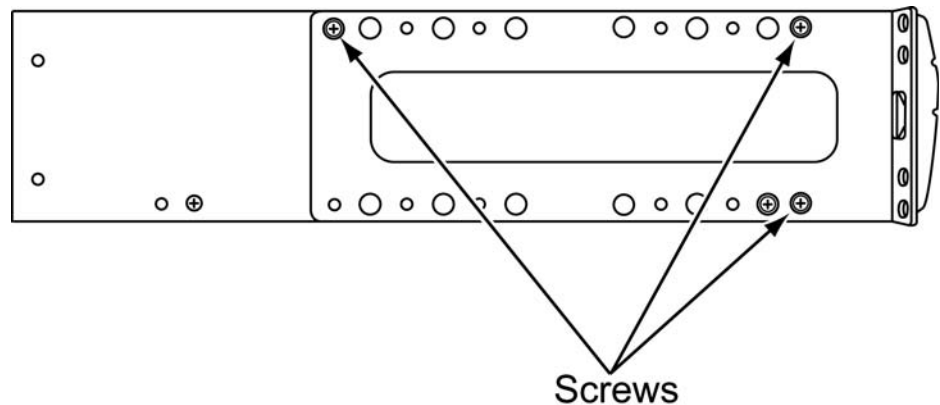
Rack Mount Bracket Installed 19" CHS2U-AU
